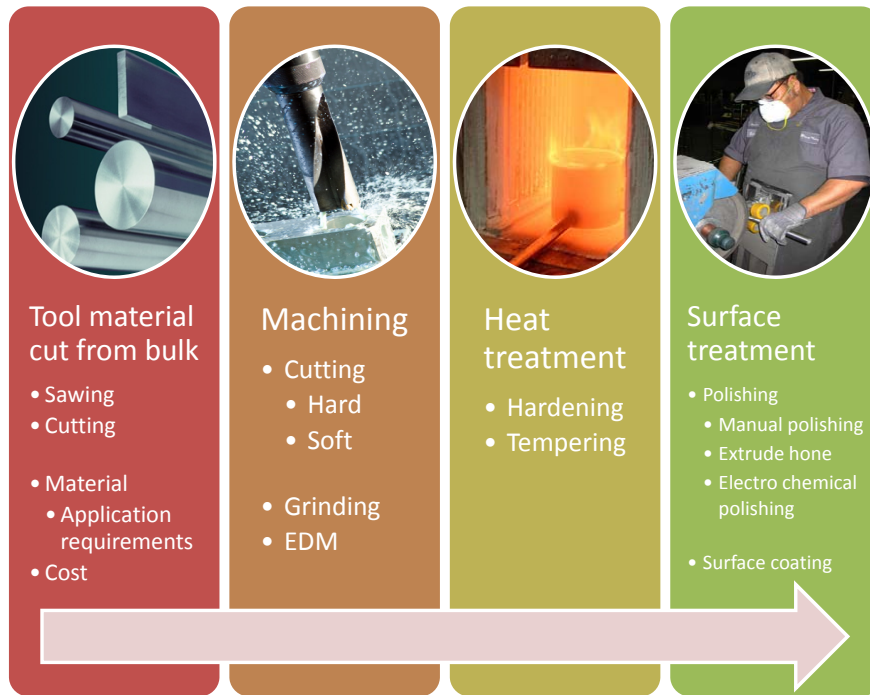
Typical processing sequence for a macro scale bulk forming tool
